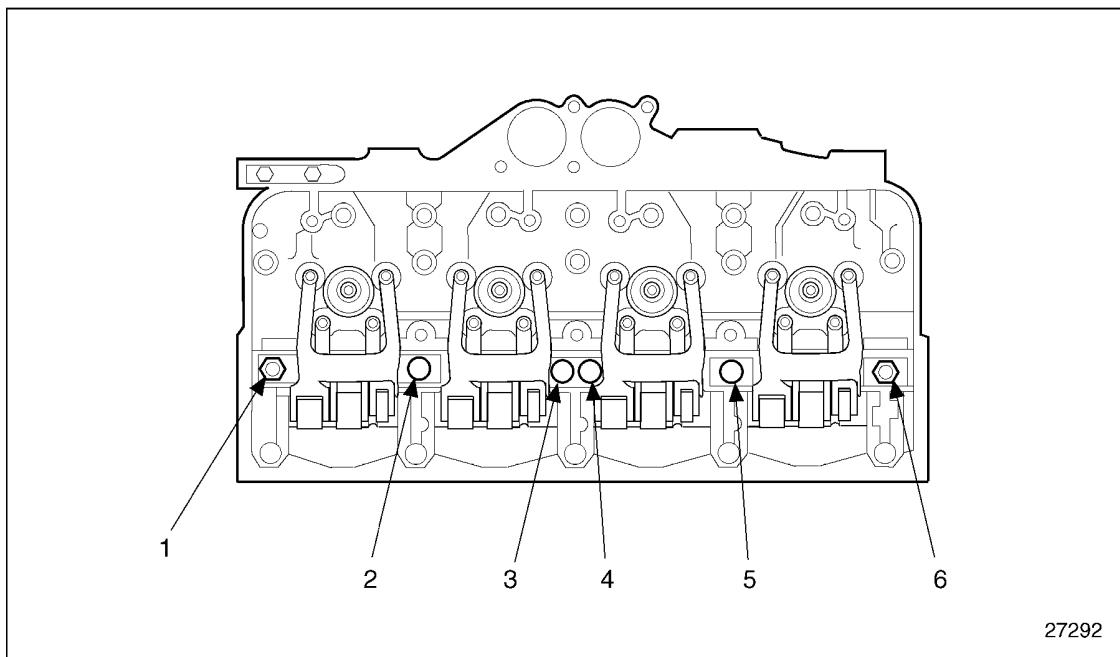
Rocker Arm Shaft Bolts and Nut Identification Numbers (Series 50G)
